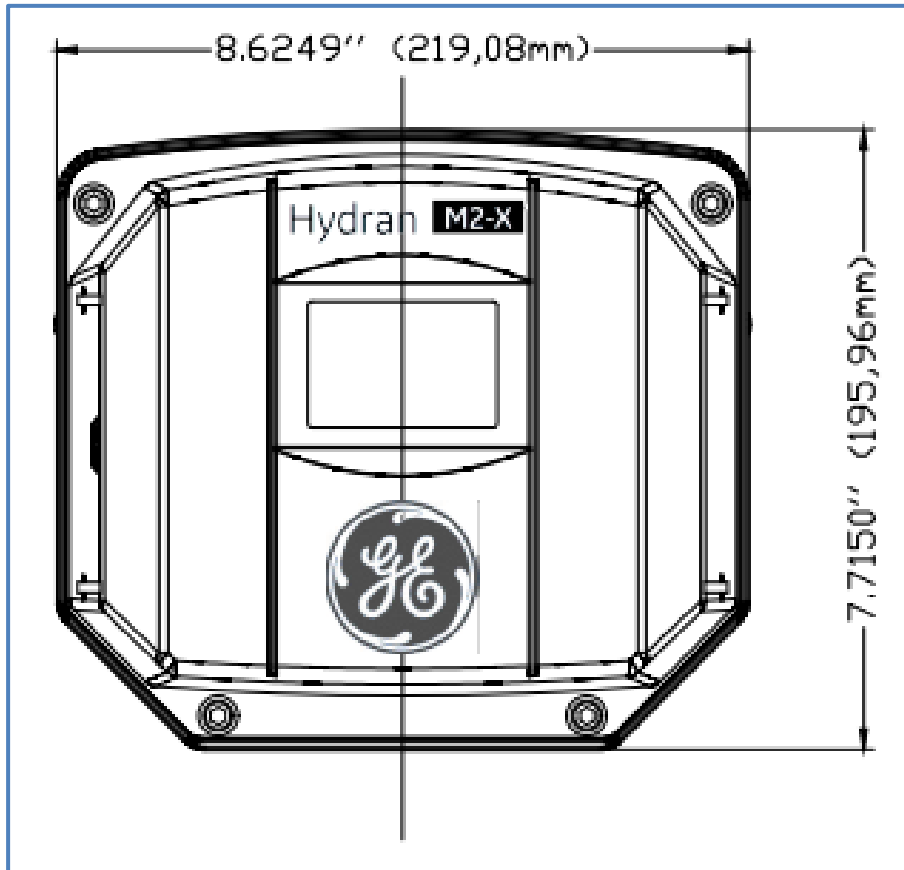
Dimensions of the Hydran M2-X Enclosure Front View
